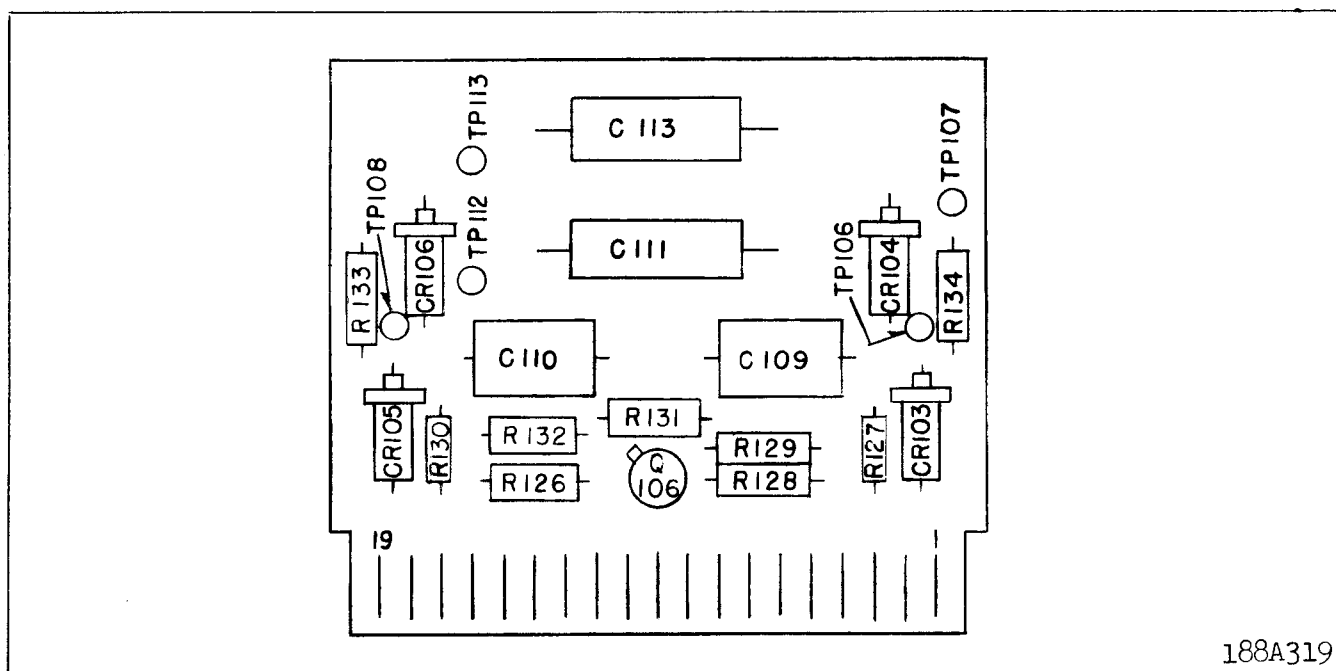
Power Amplifier Printed Circuit - Parts Location
